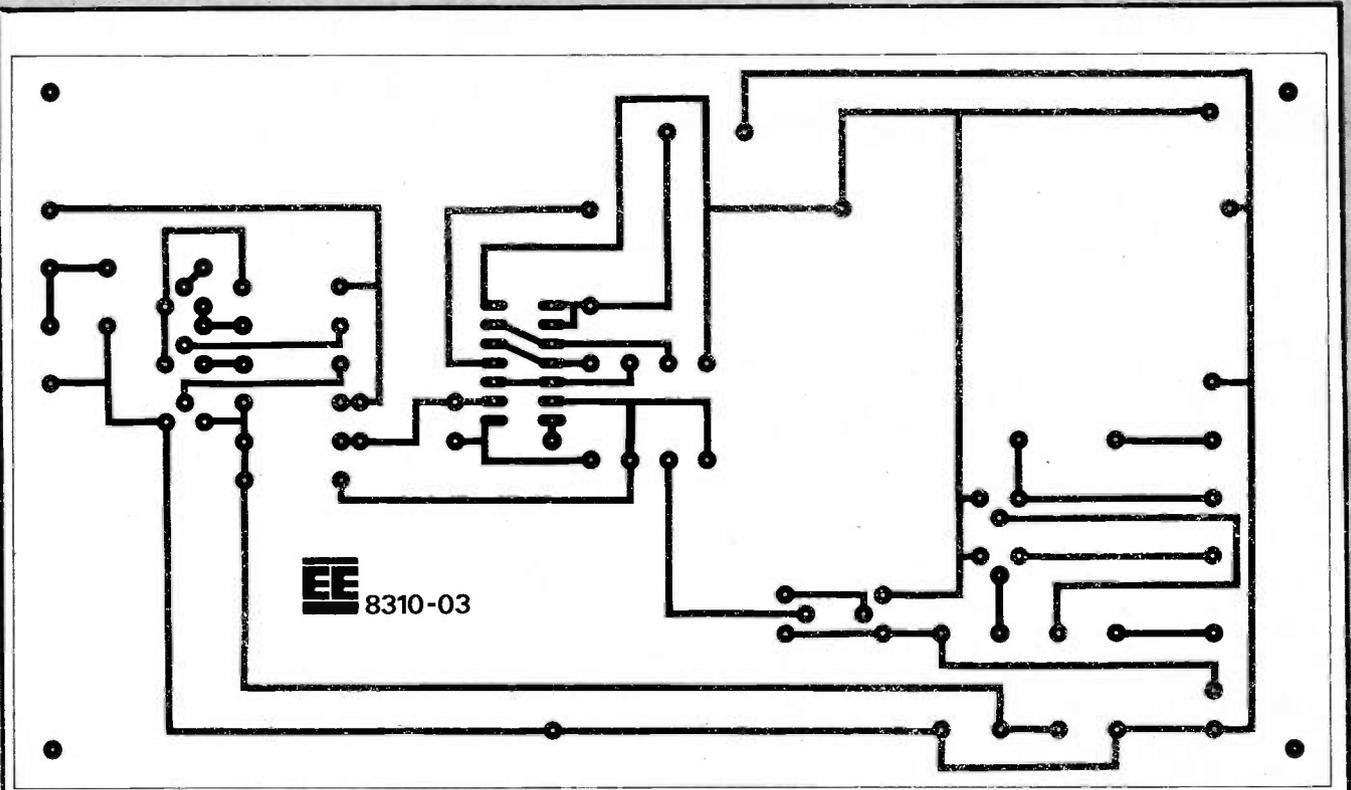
Component board layout showing off-board wiring and full-size printed circuit board master.
